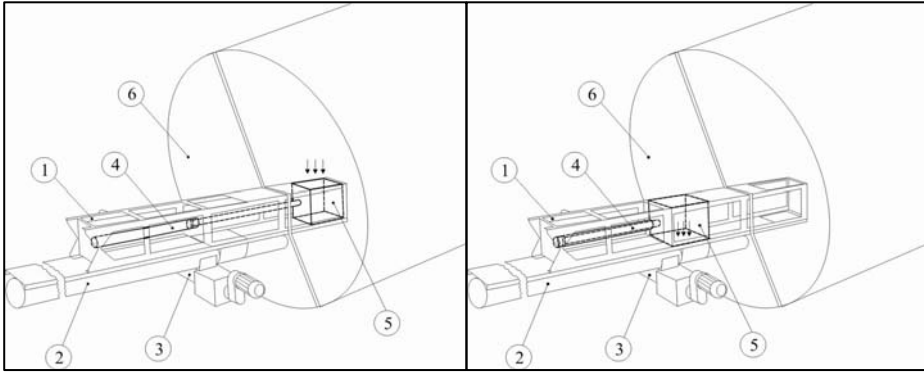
Function of the drawer. Left: filling, right: discharging. 1 frame, 2 transport screw, 3 extruder, 4 hydraulic cylinder, 5 bottomless drawer, 6 hydrolysis reactor
